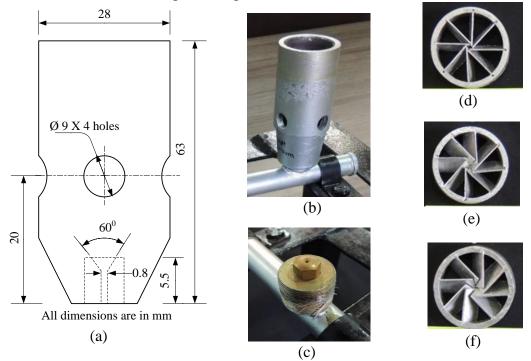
Details of tube type burner (a) Schematic diagram (b) Tube type burner (c) Fuel jet (d) 15° swirler (e) 30° swirler (f) 45° swirler.
